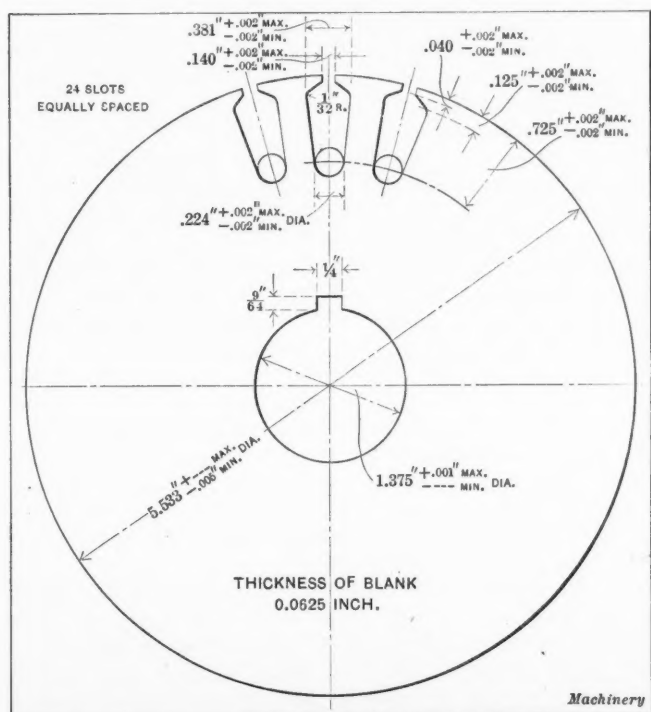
Drawing of Armature Disk showing Type of Dimensions to which the Dies are made
